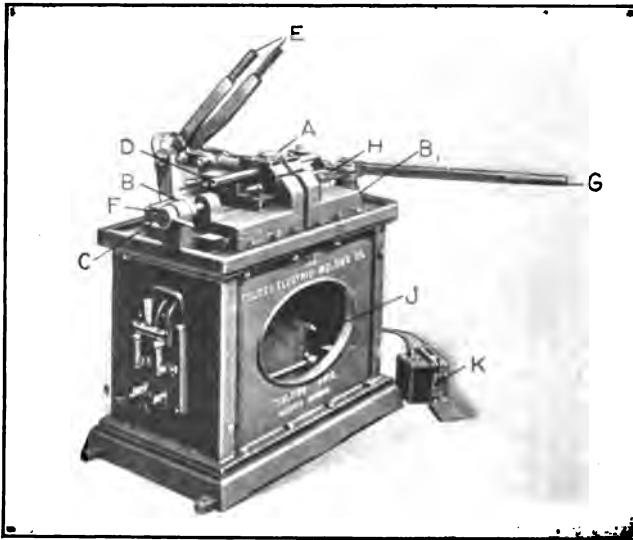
Simple Form of Machine for Welding Straight Rods or Tubes
